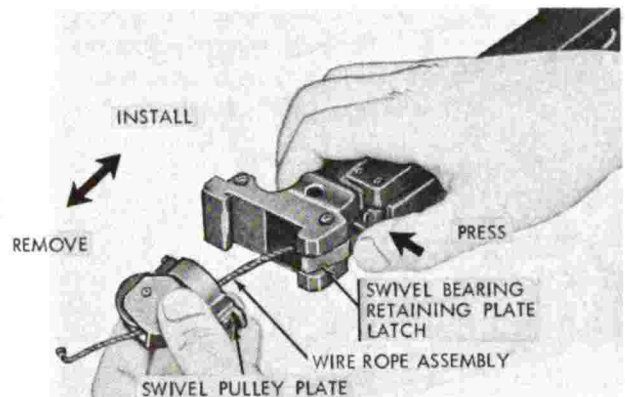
Disassembly/assembly of back plate assembly (M45, M48).
